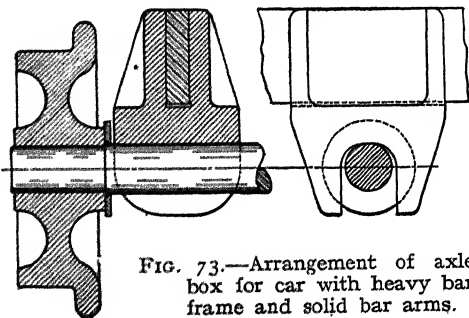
Arrangement of axle box for car with heavy bar frame and solid bar arms.
